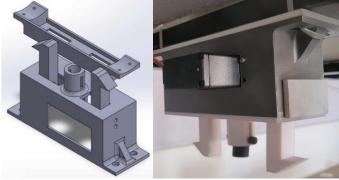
Suspension release mechanism-SolidWorks CAD (left); 3D-printed prototype mounted on the bench rig with a side-mounted servo (right)
